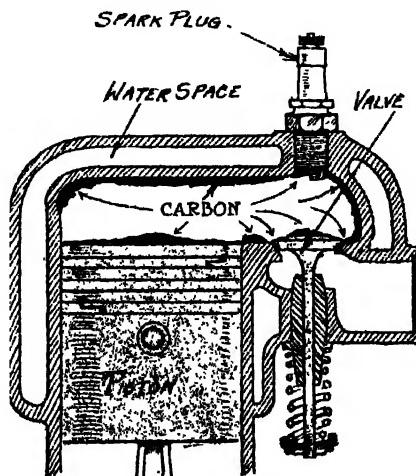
Sectional View of Upper Portion of Cylinder Showing Point Where Carbon Deposits Accumulate.
